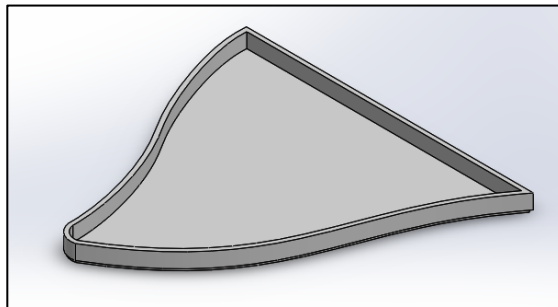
Base mold to close the cavities of lower part of the right fin.
